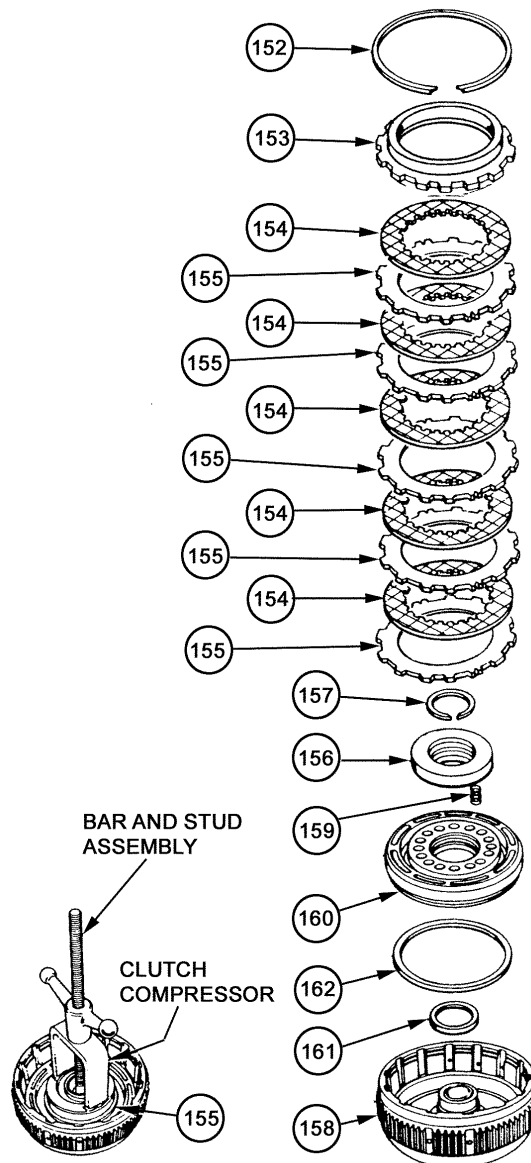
Fourth and Reverse Clutch Housing Assembly Components.
